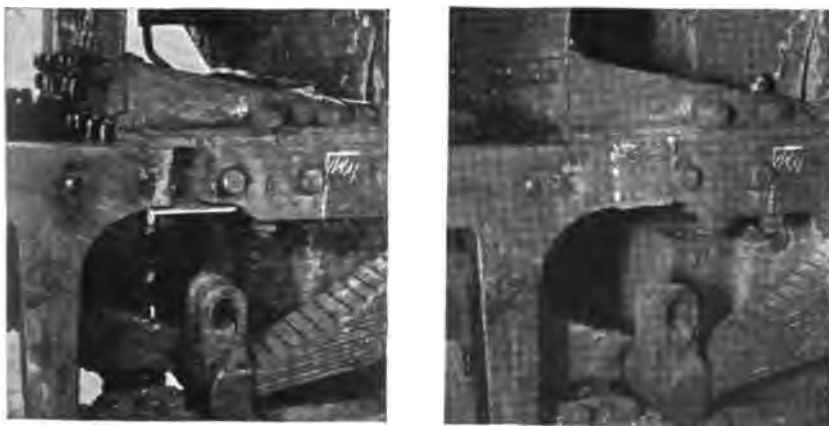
Fractured Locomotive Side Frame Cut Out with Graphite Electrode and Welded with Metallic Electrode
